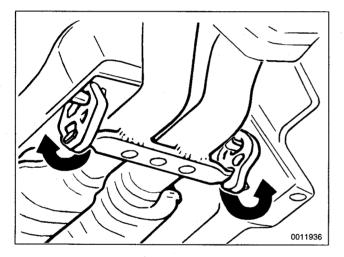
Rubber exhaust system hangers. Remove hanger by prying off bracket (arrows).
